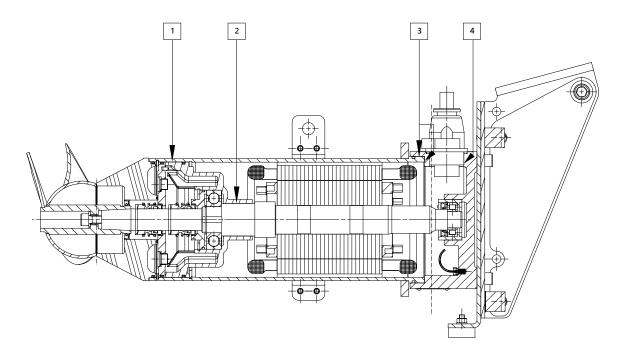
Flamepaths on explosion-proof motors - Variant C
